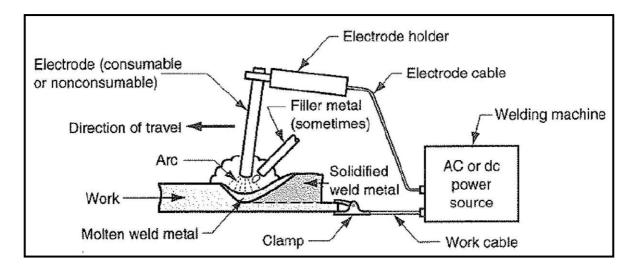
Schematic of a shielded metal arc welding process.
